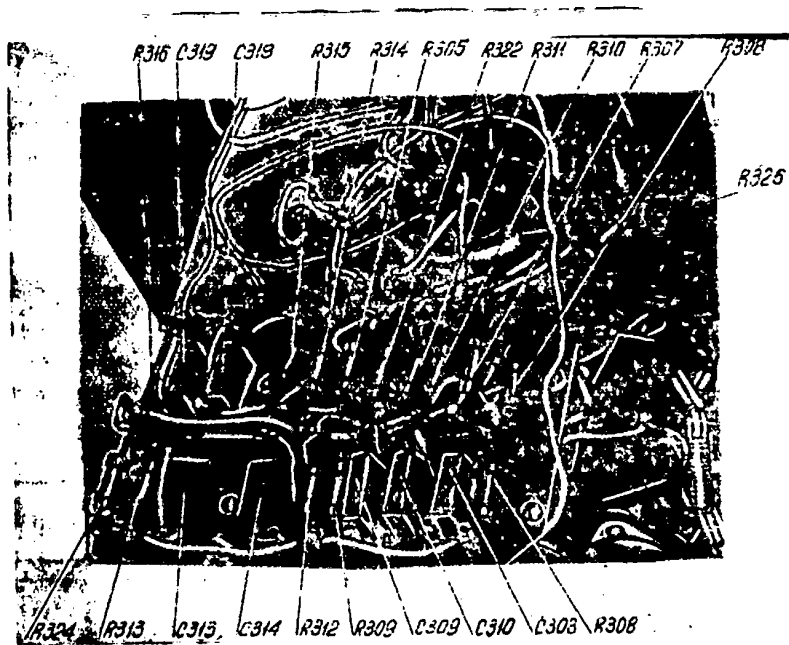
Location of components on the crystal oscillator chassis / bottom view.
